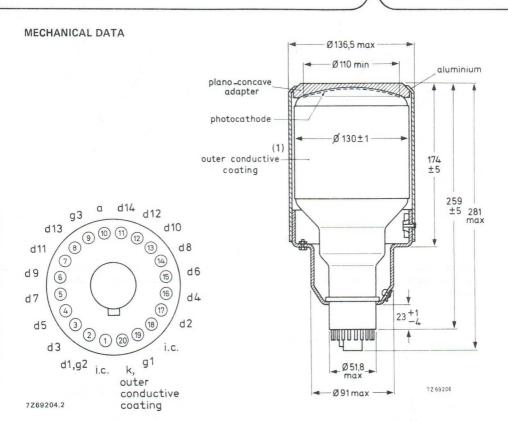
Care should be taken in handling this larger diameter tube because of the risk of implosion.
